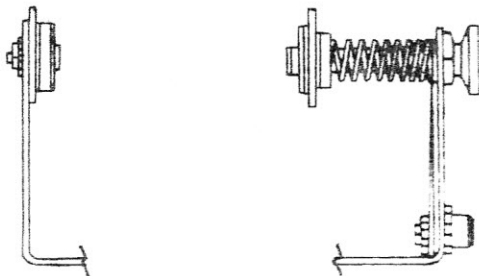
Paper Roll Bracket for 8½" or 210 mm, 1" Core Roll, with Washer
